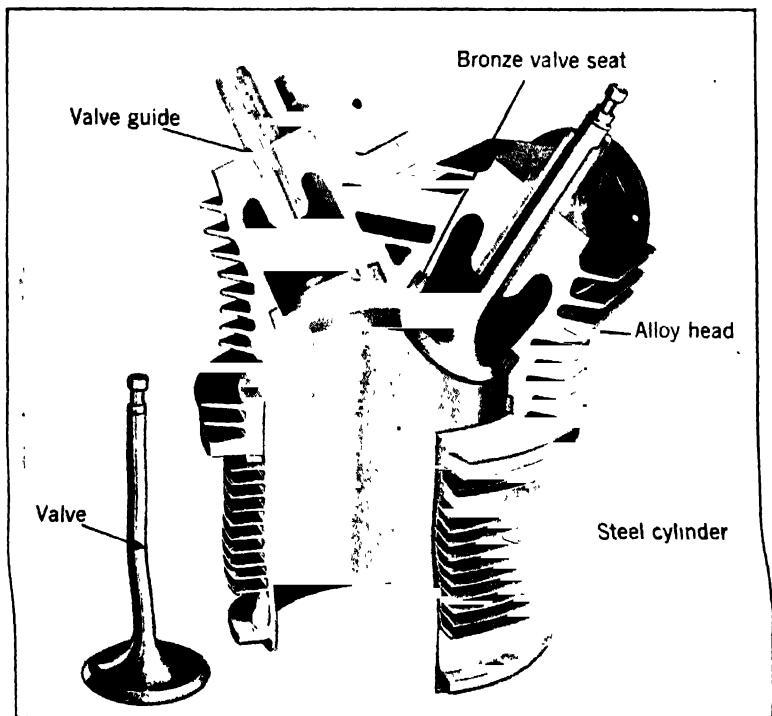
Cross Section of Fairchild-Caminez Cylinder Showing Steel Barrel and Aluminum Head Construction, Valveports and Valves.
